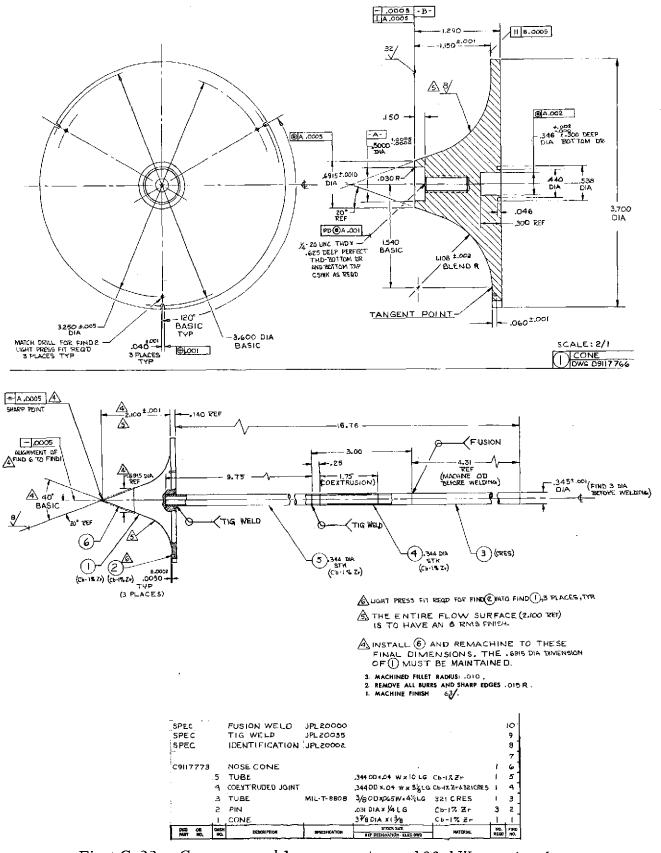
Cone assembly, separator - 100-kW erosion loop
